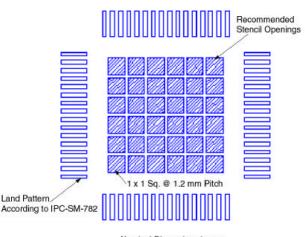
Reduced Solder Stencil Aperture for Exposed Pad
